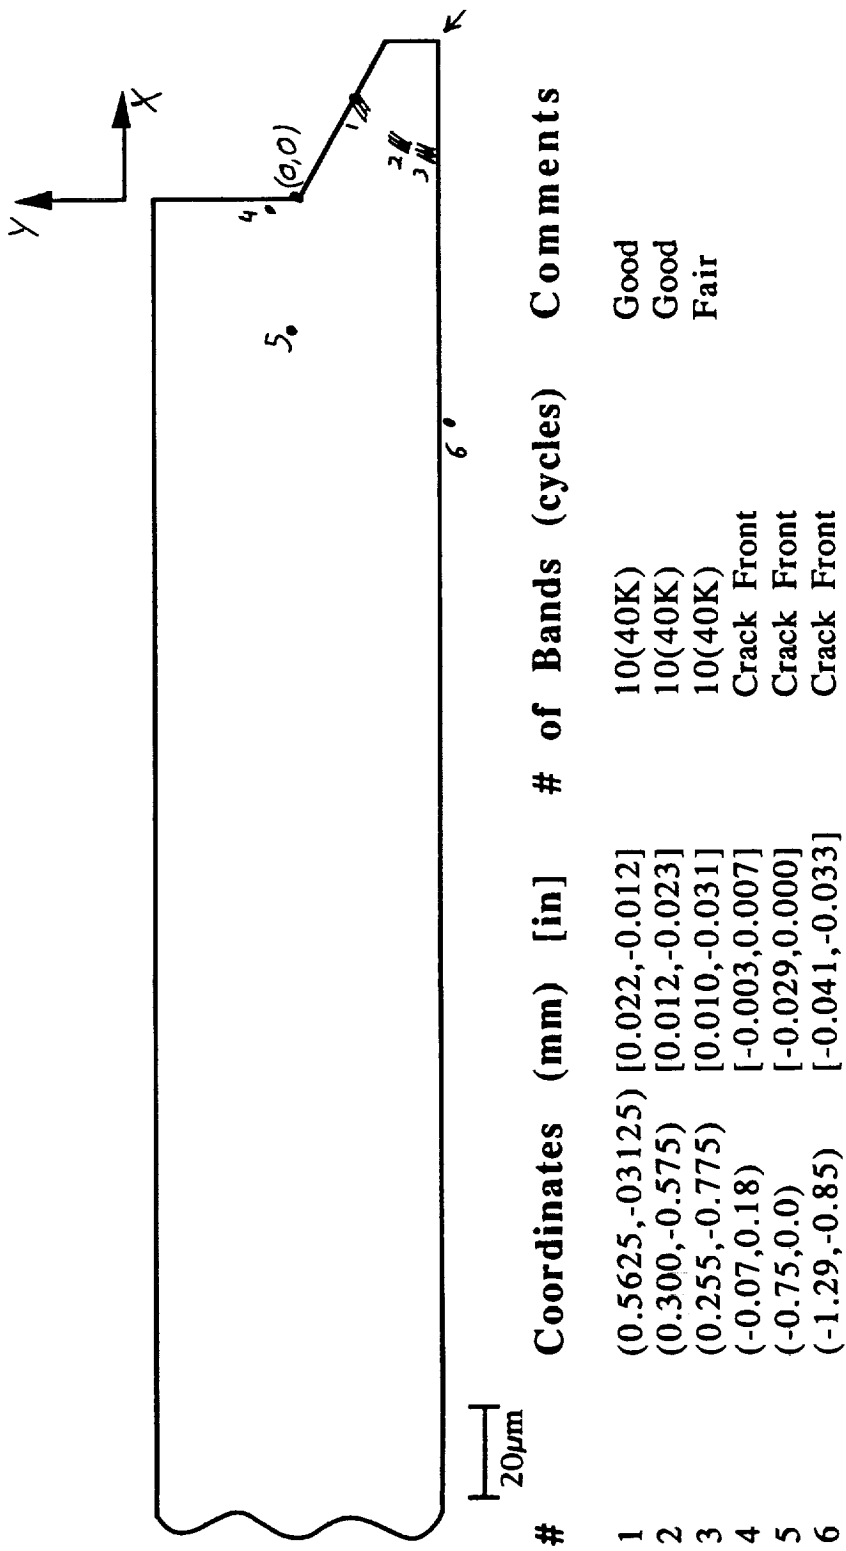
Rivet hole schematic: Upper rivet row, hole number 4J2, fatigue crack growth is in the aft direction.
